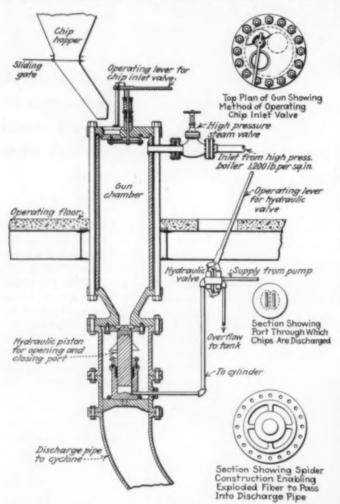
Cross-section of the High-Pressure Steam Gun in Which Sawmiii Waste is Exploded to Produce Raw Material for Insulating Lumber
